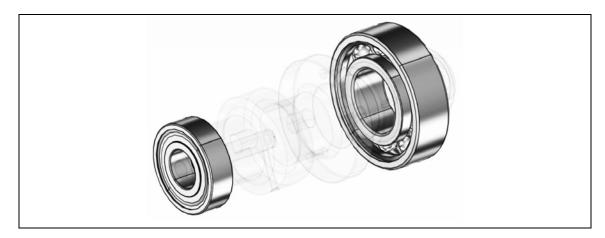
Camshaft Roller Bearings (XY150)¹⁹⁷
